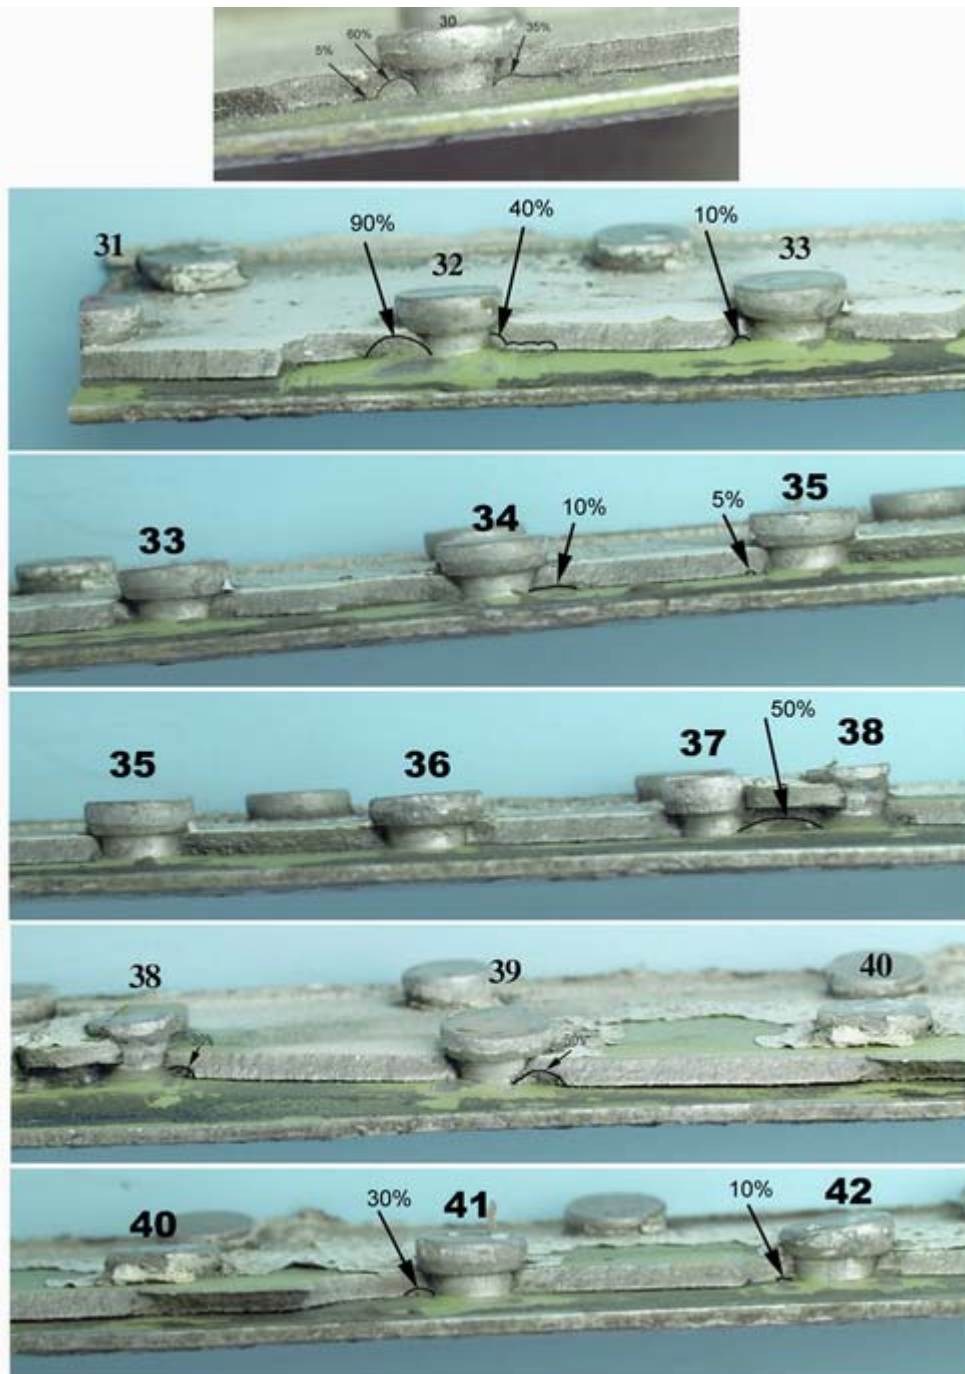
Shown the extent of fatigue cracking
